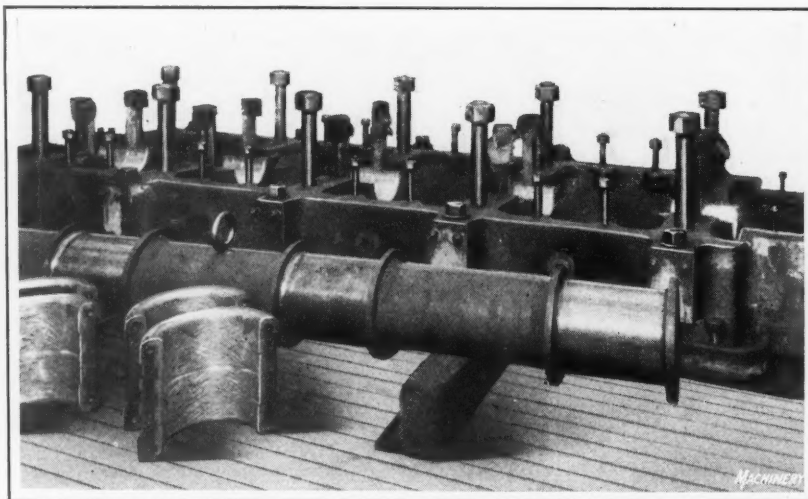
Bed after boring, with Caps removed and Bearing Shells in Place
